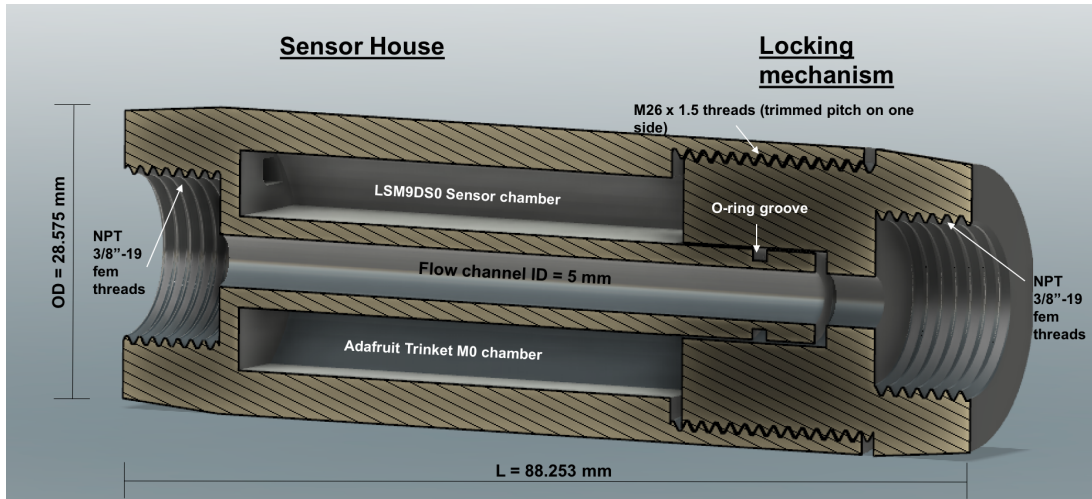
Cross-section analysis showing the dimensions of the sensor house design. The section analysis is used to ensure that thread pitch and depth of threads will match up once the sensor house is 3D printed.
